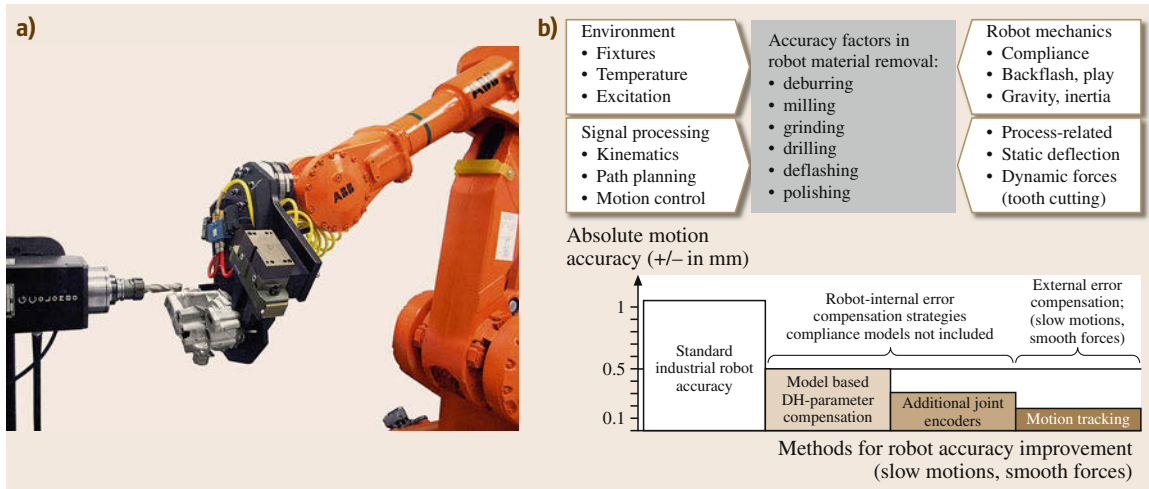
d For small-to-medium-sized parts, a preferred configuration is to have the part grasped and guided by the robot relative to the fixed spindle. (a) The robot's gripper is mounted on a force–torque sensor to measure and limit process forces. For machining the edges of the workpiece (deflashing) the machining software package provides a machine-learning technique for optimising the motions [54.51]. (b) Influences on accuracy in robotic machining and methods for robot accuracy improvement. Still typical machine tool motion accuracies are in the order of ± 0.01 mm or better (courtesy of ABB, Fraunhofer IPA)
